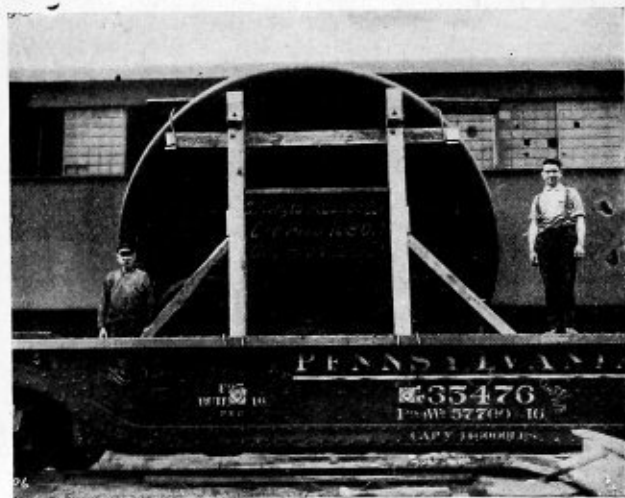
Marine Boiler Head Loaded on Well-Bottom Car
